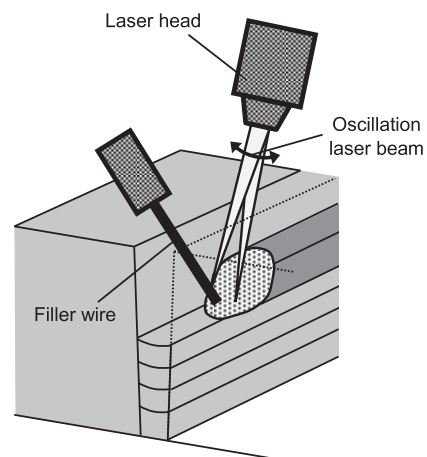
Schematic illustration of narrow gap welding process
